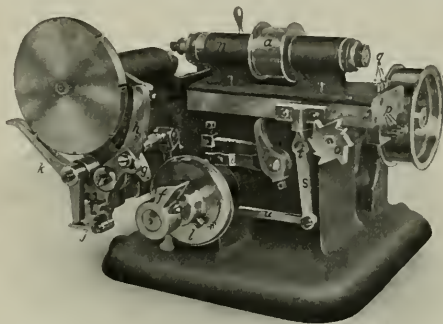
Side View showing Operation of Cutter Shifting Mechanism.
